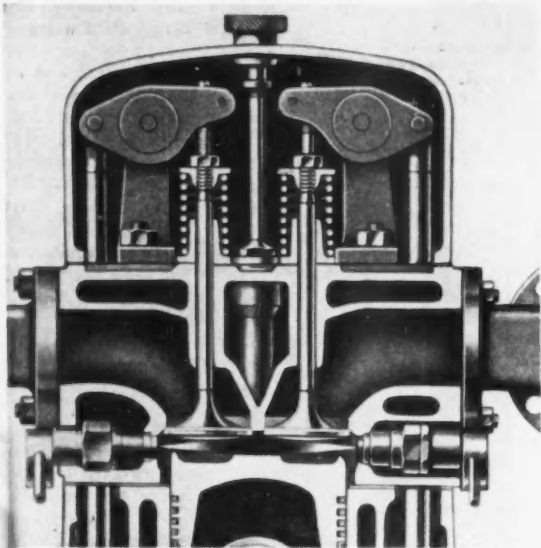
Combustion chamber arrangement adopted in 1923 by M. A. N. for its Diesel truck and bus engines.
